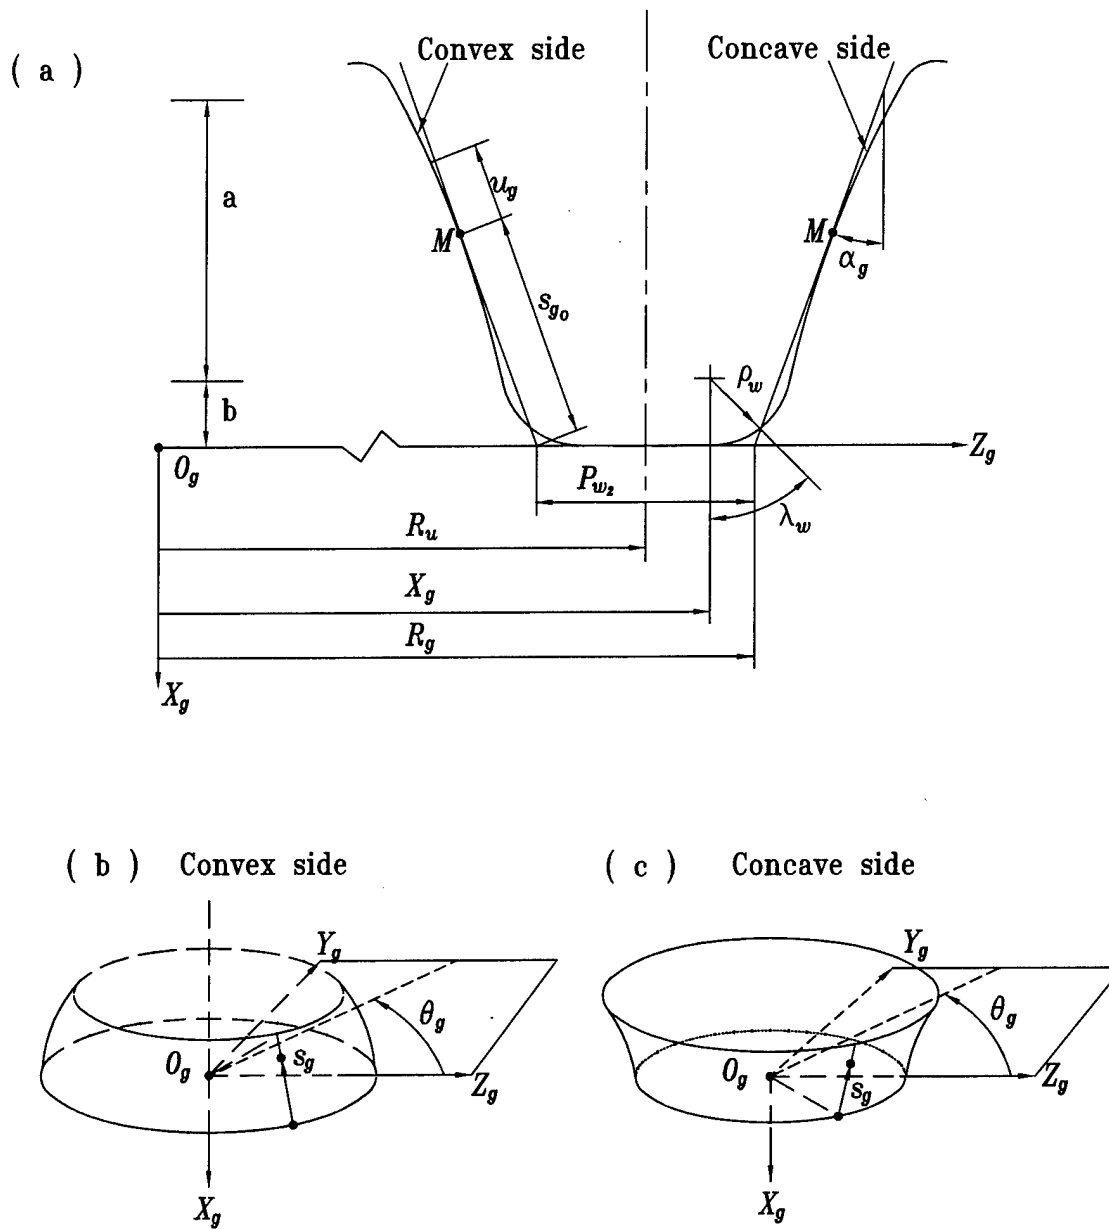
Illustration of gear cutter blades and generating surfaces.
